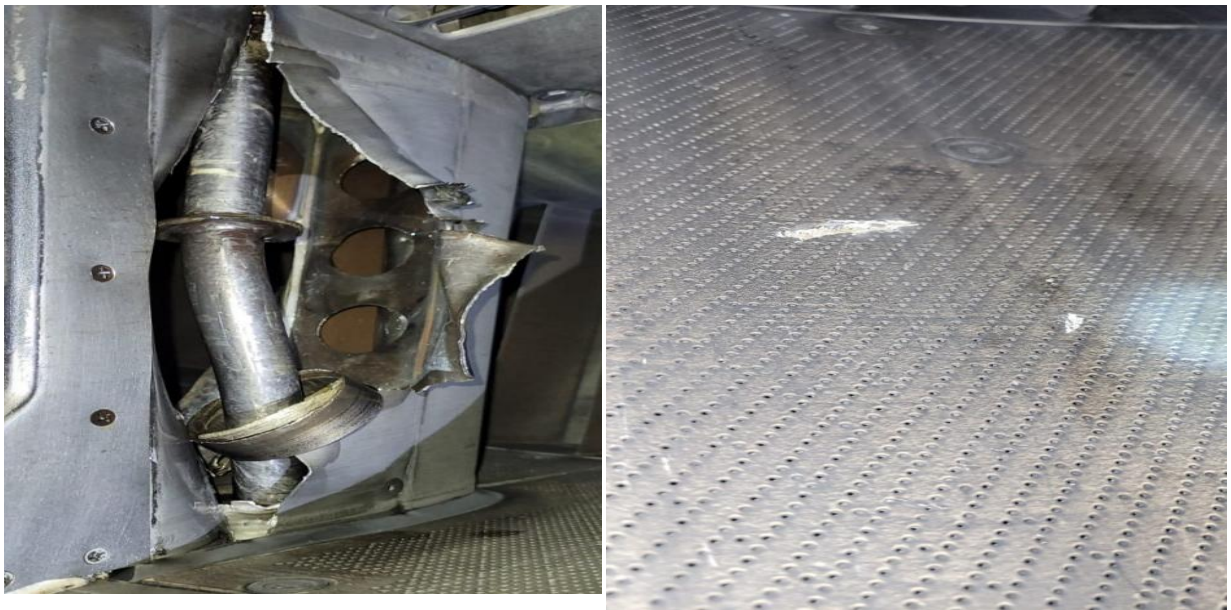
Damages on the Fan frame strut #7 and RDS outer casing
